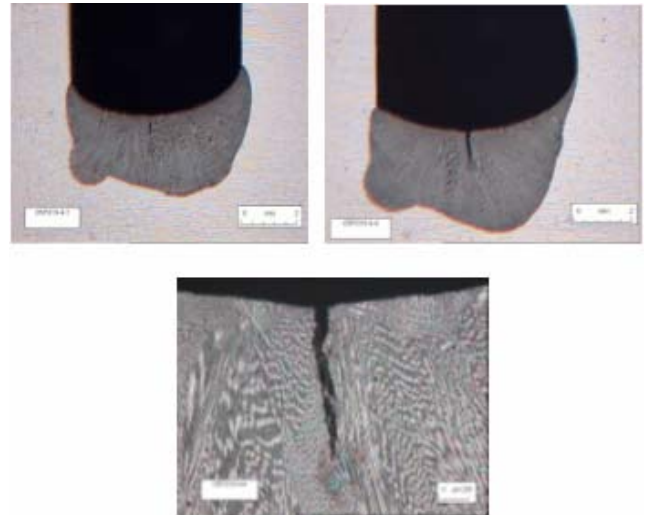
Hybrid cross sections with hot cracks and lack of fusion in weld centreline
